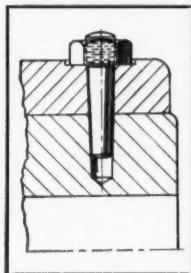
Drawing showing design of taper pin having threaded end to accommodate hex nut.
